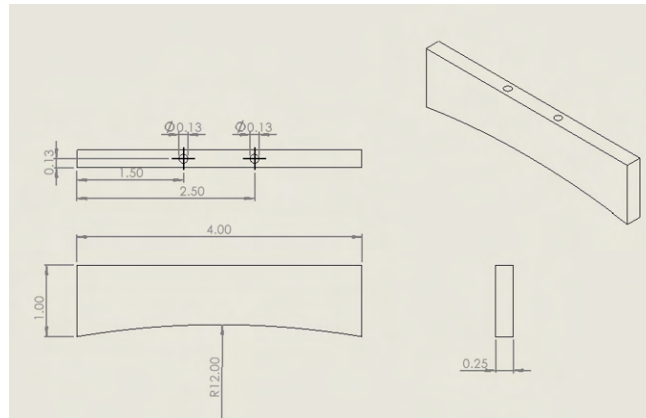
This figure shows the engineering drawing of the brake mechanism.
